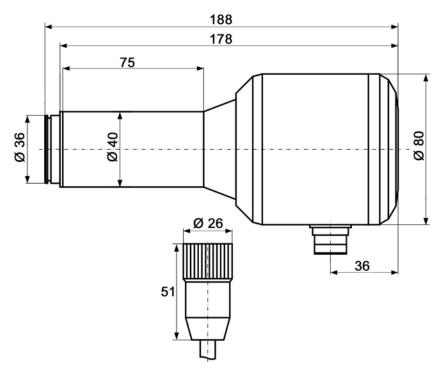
Dimensional drawing compact flame scanner F200K, F200K Ex-II
